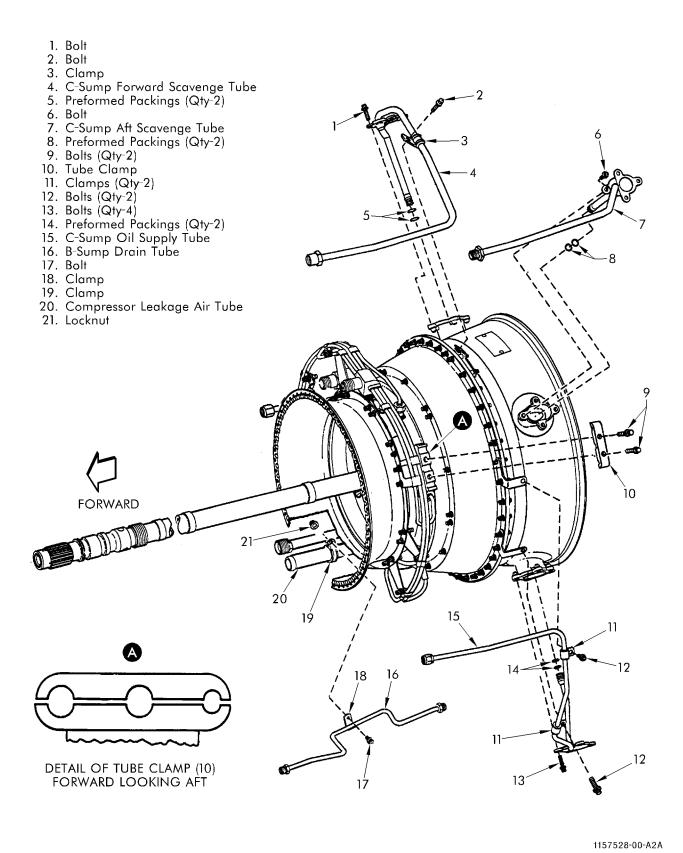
Power Turbine Module External Components; Removal and Installation
